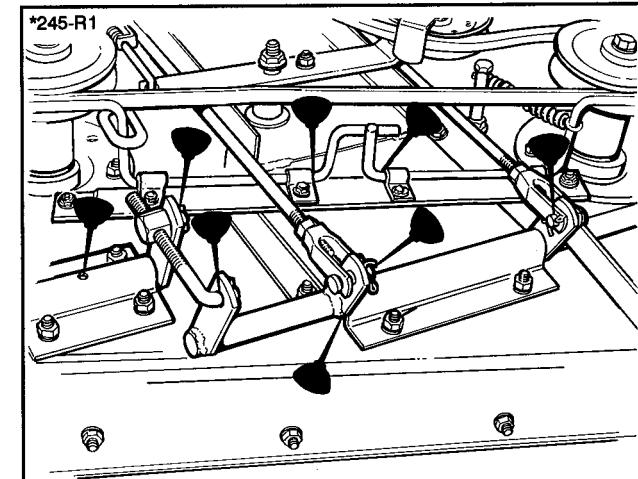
Lubricate Brake Lever, Clevises, & Levelling Rod.
